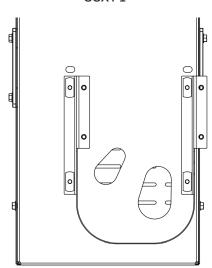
Location of TXT 8 and 9 Housing Bolts to Mount to the Reducer Mounting Bracket
